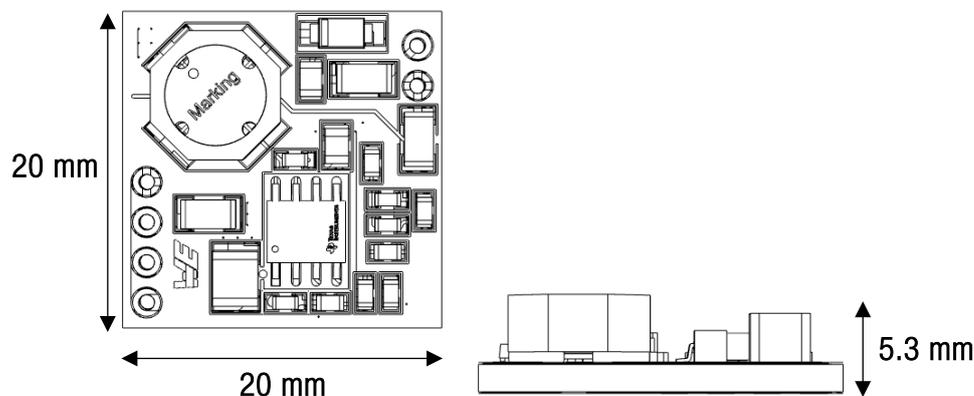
RD006 Board Dimensions: board sides (left), board height (with 1.5 mm thick PCB) (right)
